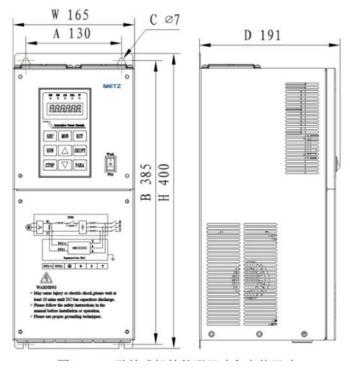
C2 wall-mounted chassis dimensions and installation dimensions
